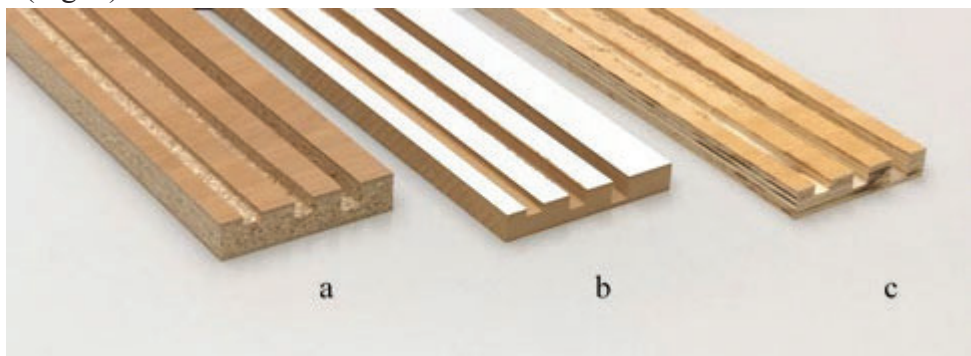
Processed workpieces: a – particle board; b – MDF; c – plywood
